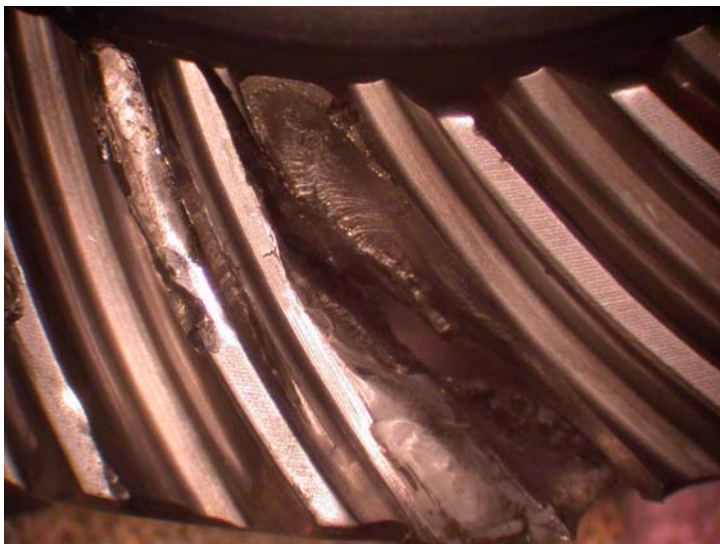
Photograph of the separated part sat into the gear. Shows that a tooth is missing.
